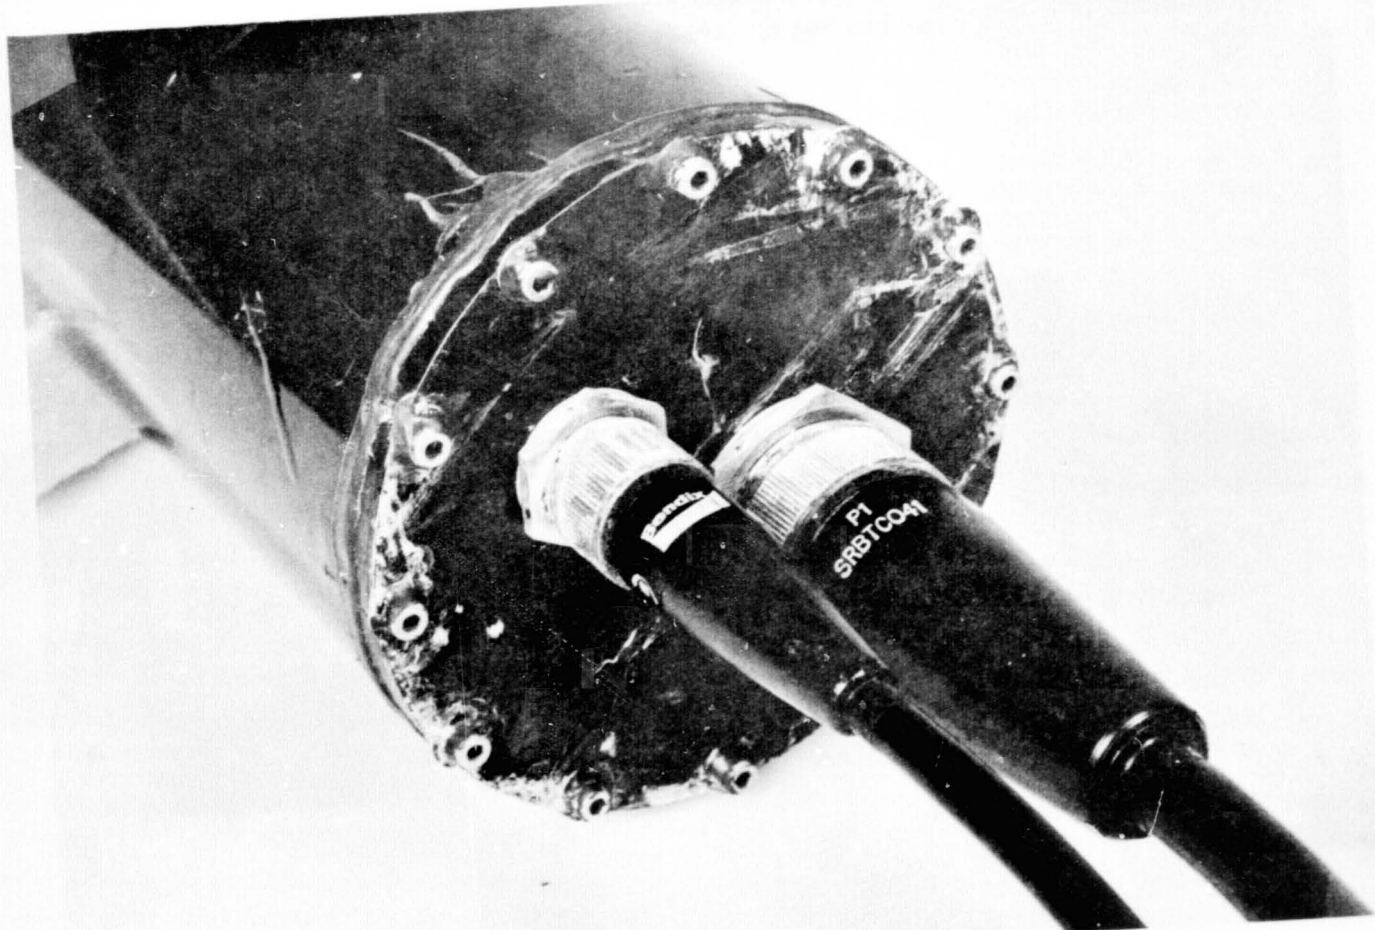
SRB watertight black box/ cable assembly No. 2 (end view after three test cycles).
